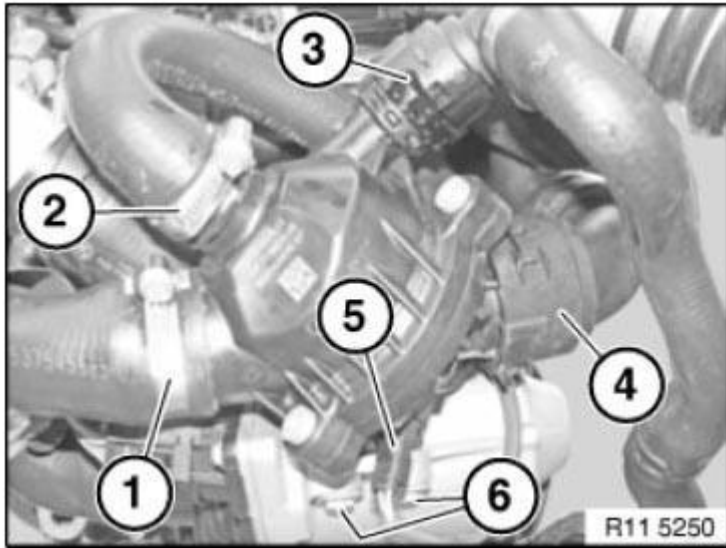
Identifying Hose, Hose Clamp And Plug Connection
